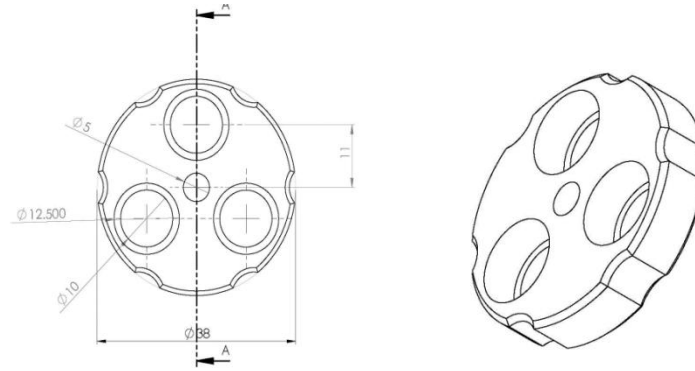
CAD drawing of the three-hole filter wheel (units in millimeters) ^[21]
